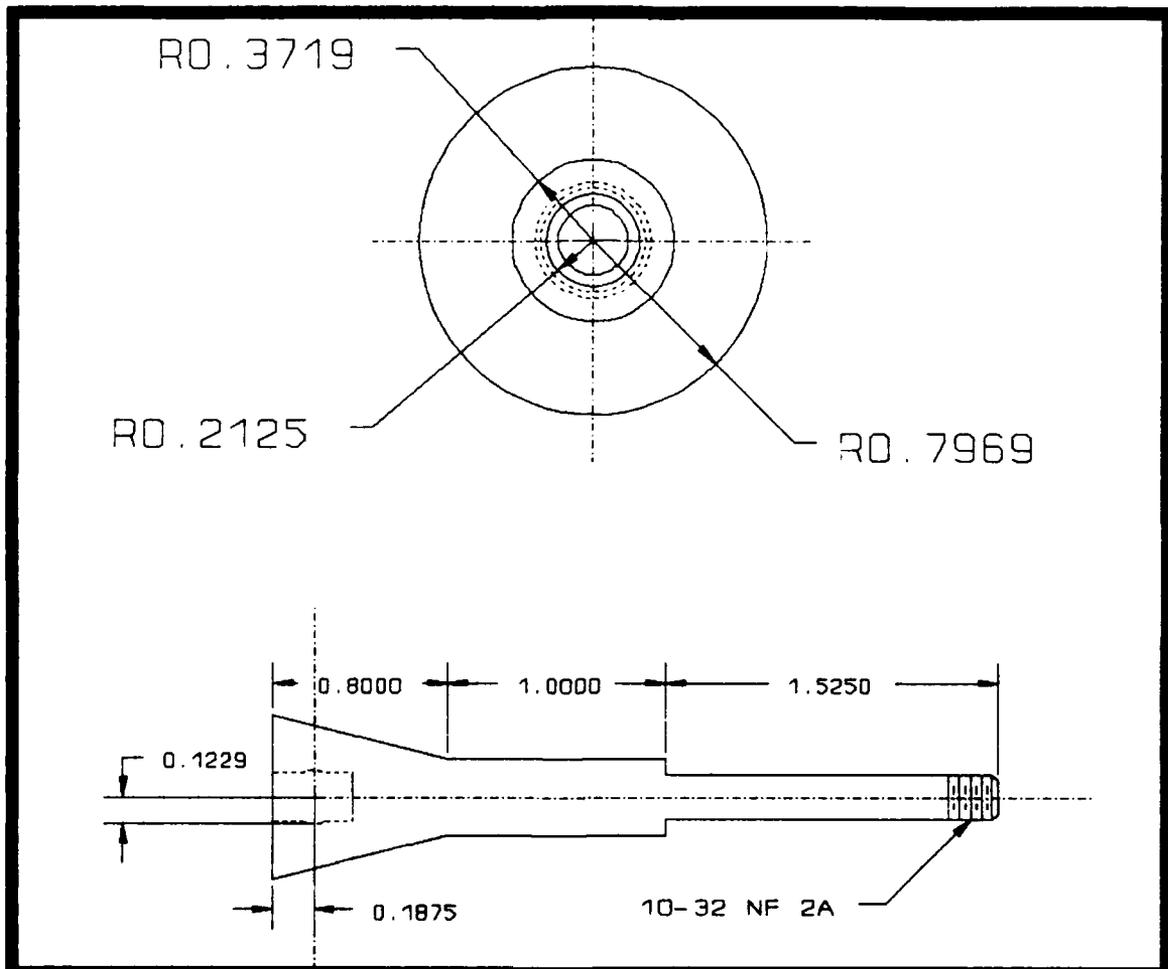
Top view (bottom schematic) of the collet and an exploded end view (top schematic) of the collet's left side. (Dimensions are in inches).
